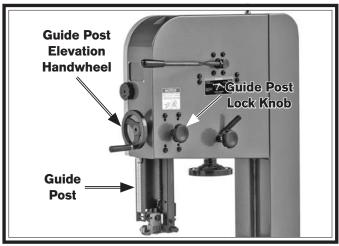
Location of guide post, elevation handwheel, and lock knob.
